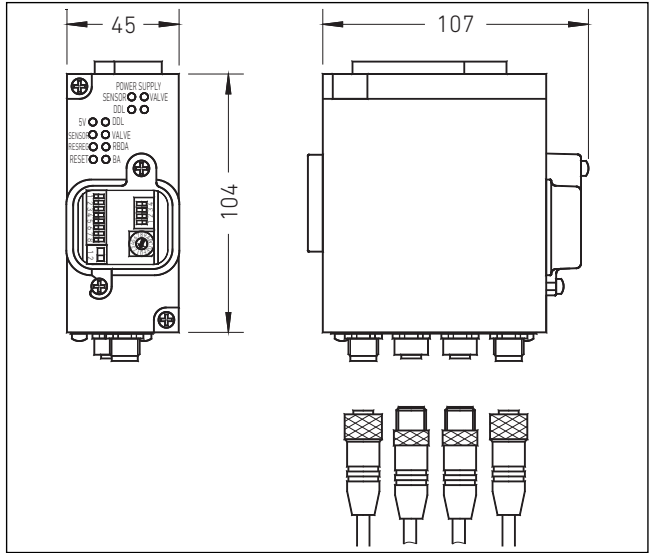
Dimensions of the bus coupler with drivers (337 500 046 0)
